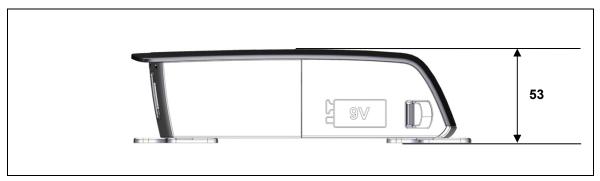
Dimensions of the HE-300 SMPS POWER SUPPLY, in mm, side view
